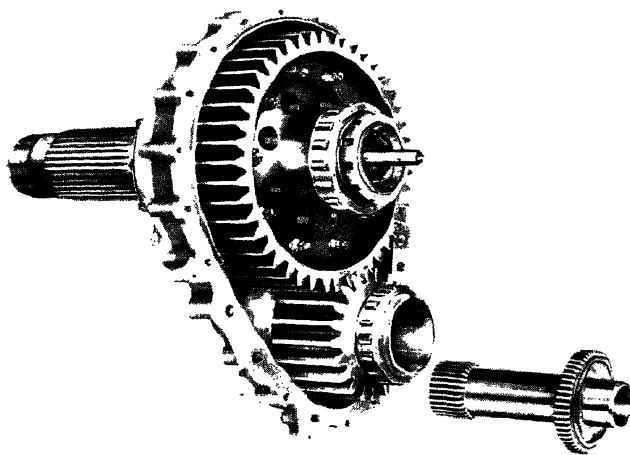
The Rolls Royce "Merlin" engine airscrew reduction gear which is similar in principle to that shown in Fig. 233.
